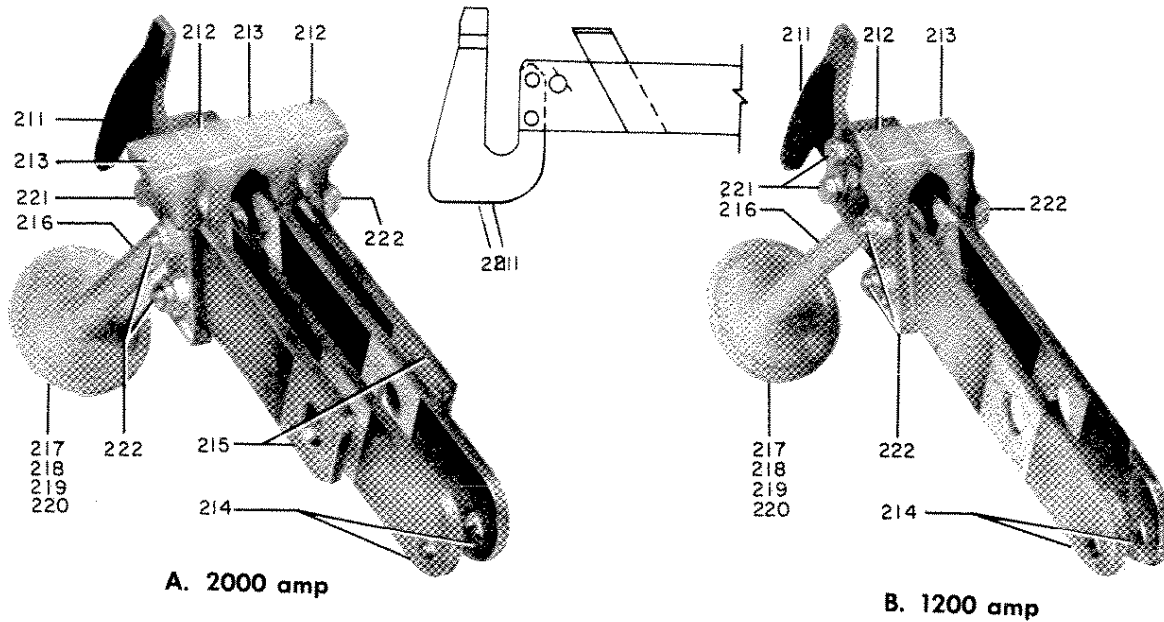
Movable contact arm assembly (Ref. No. 210)
